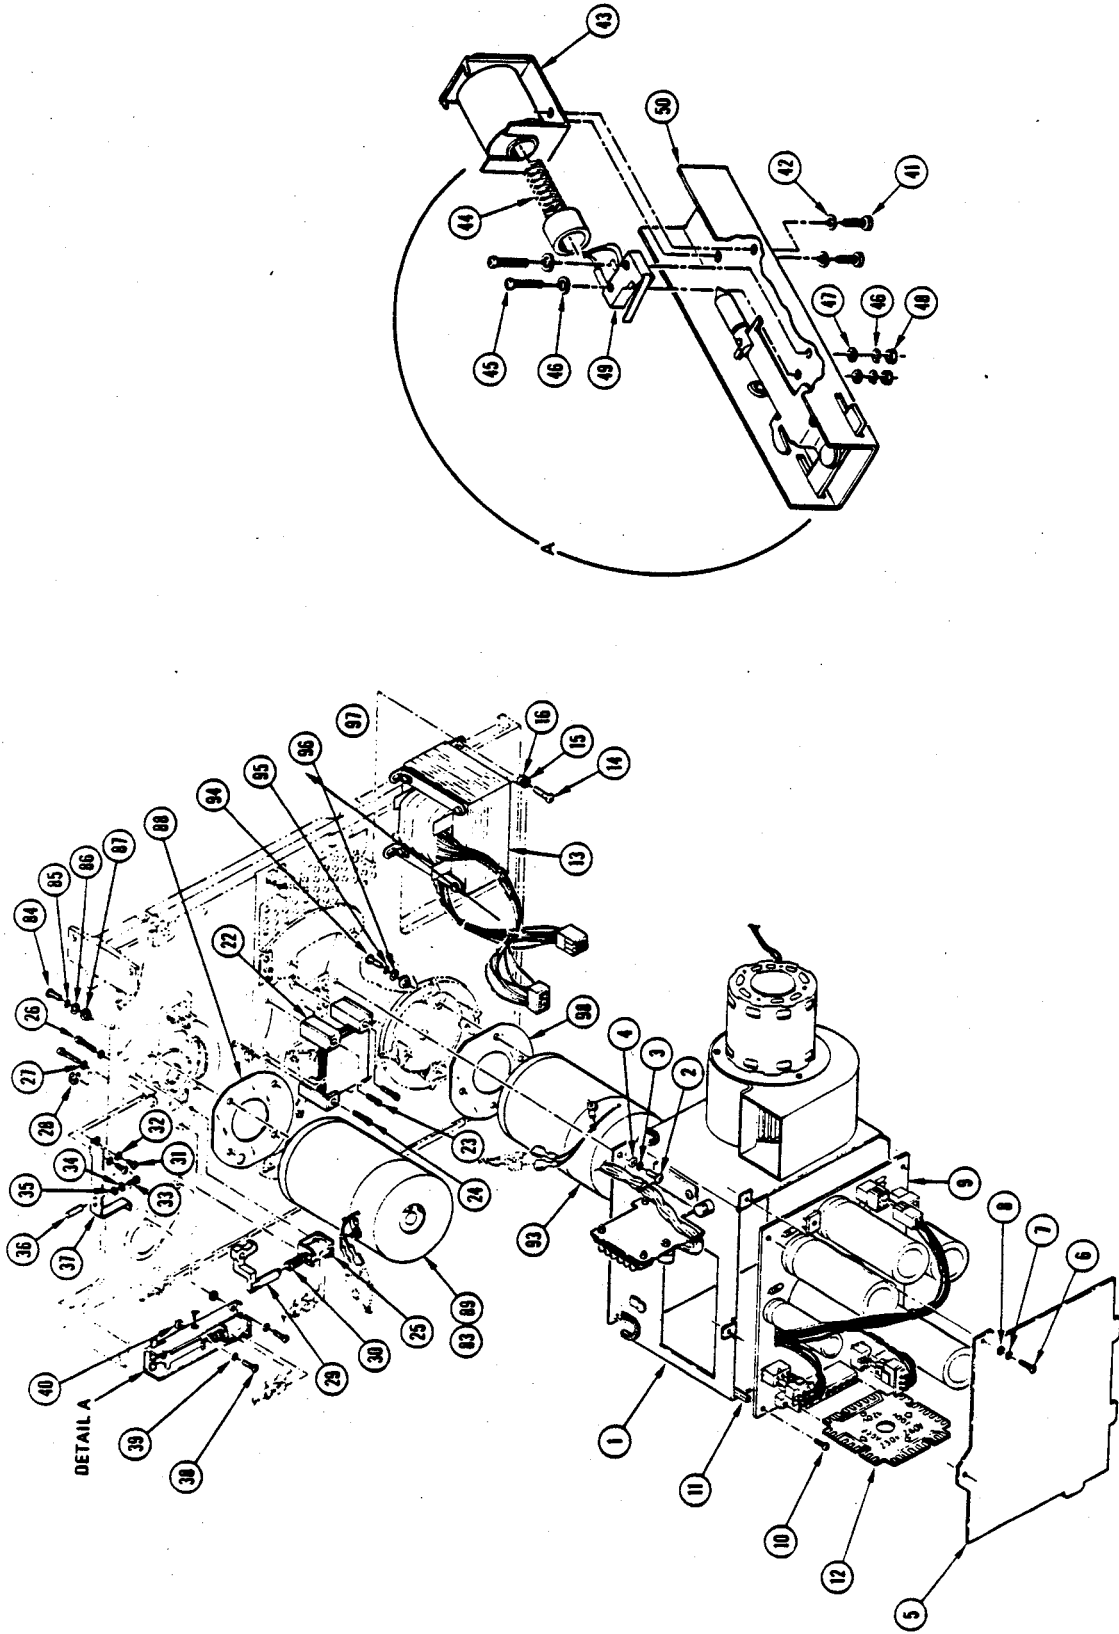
Top Plate/Chassis Assembly (Exploded View)
